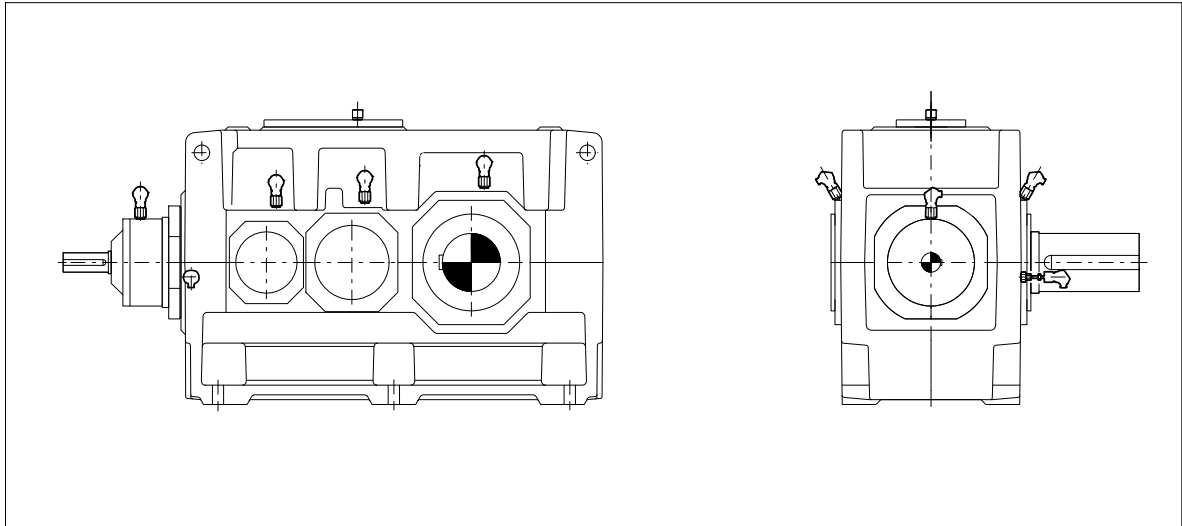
Bearing monitoring by Pt 100 resistance thermometer on gear units type B3.H
